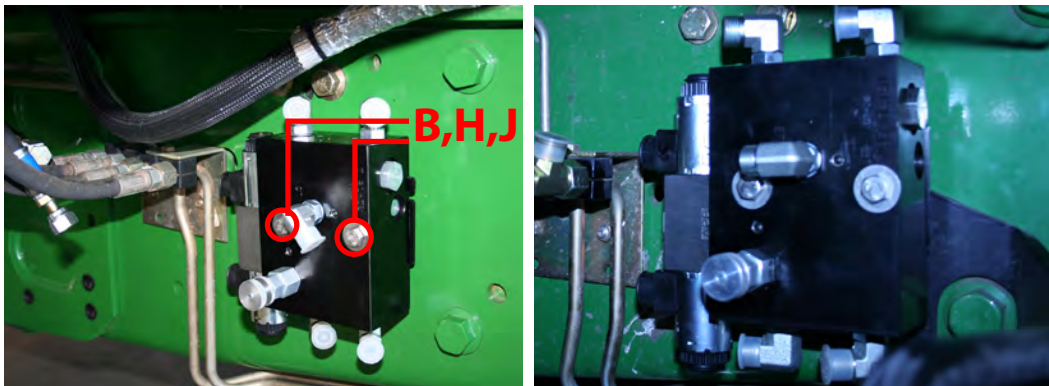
Install FieldPilot Valve Mounting Bracket
